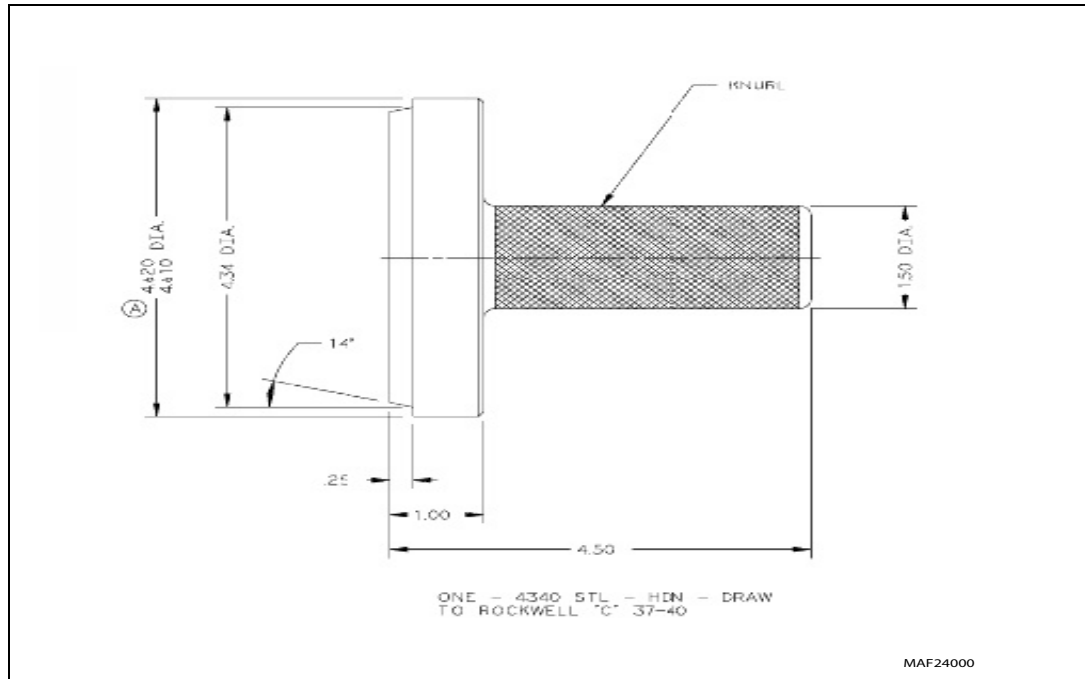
Bearing Cup Pressing Tool (T149013)
